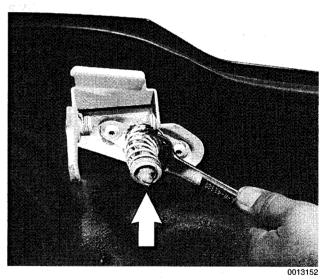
To lengthen spring pin, loosen locknut with wrench inserted through spring, then turn pin (arrow) counterclockwise.
